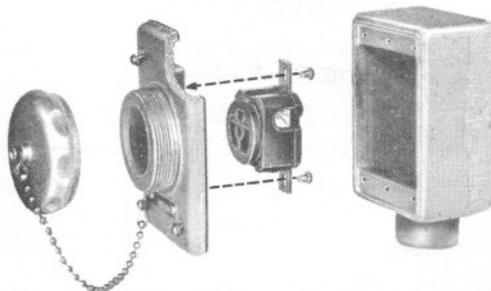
KS-14611, List 19 Power Cord Assembly
